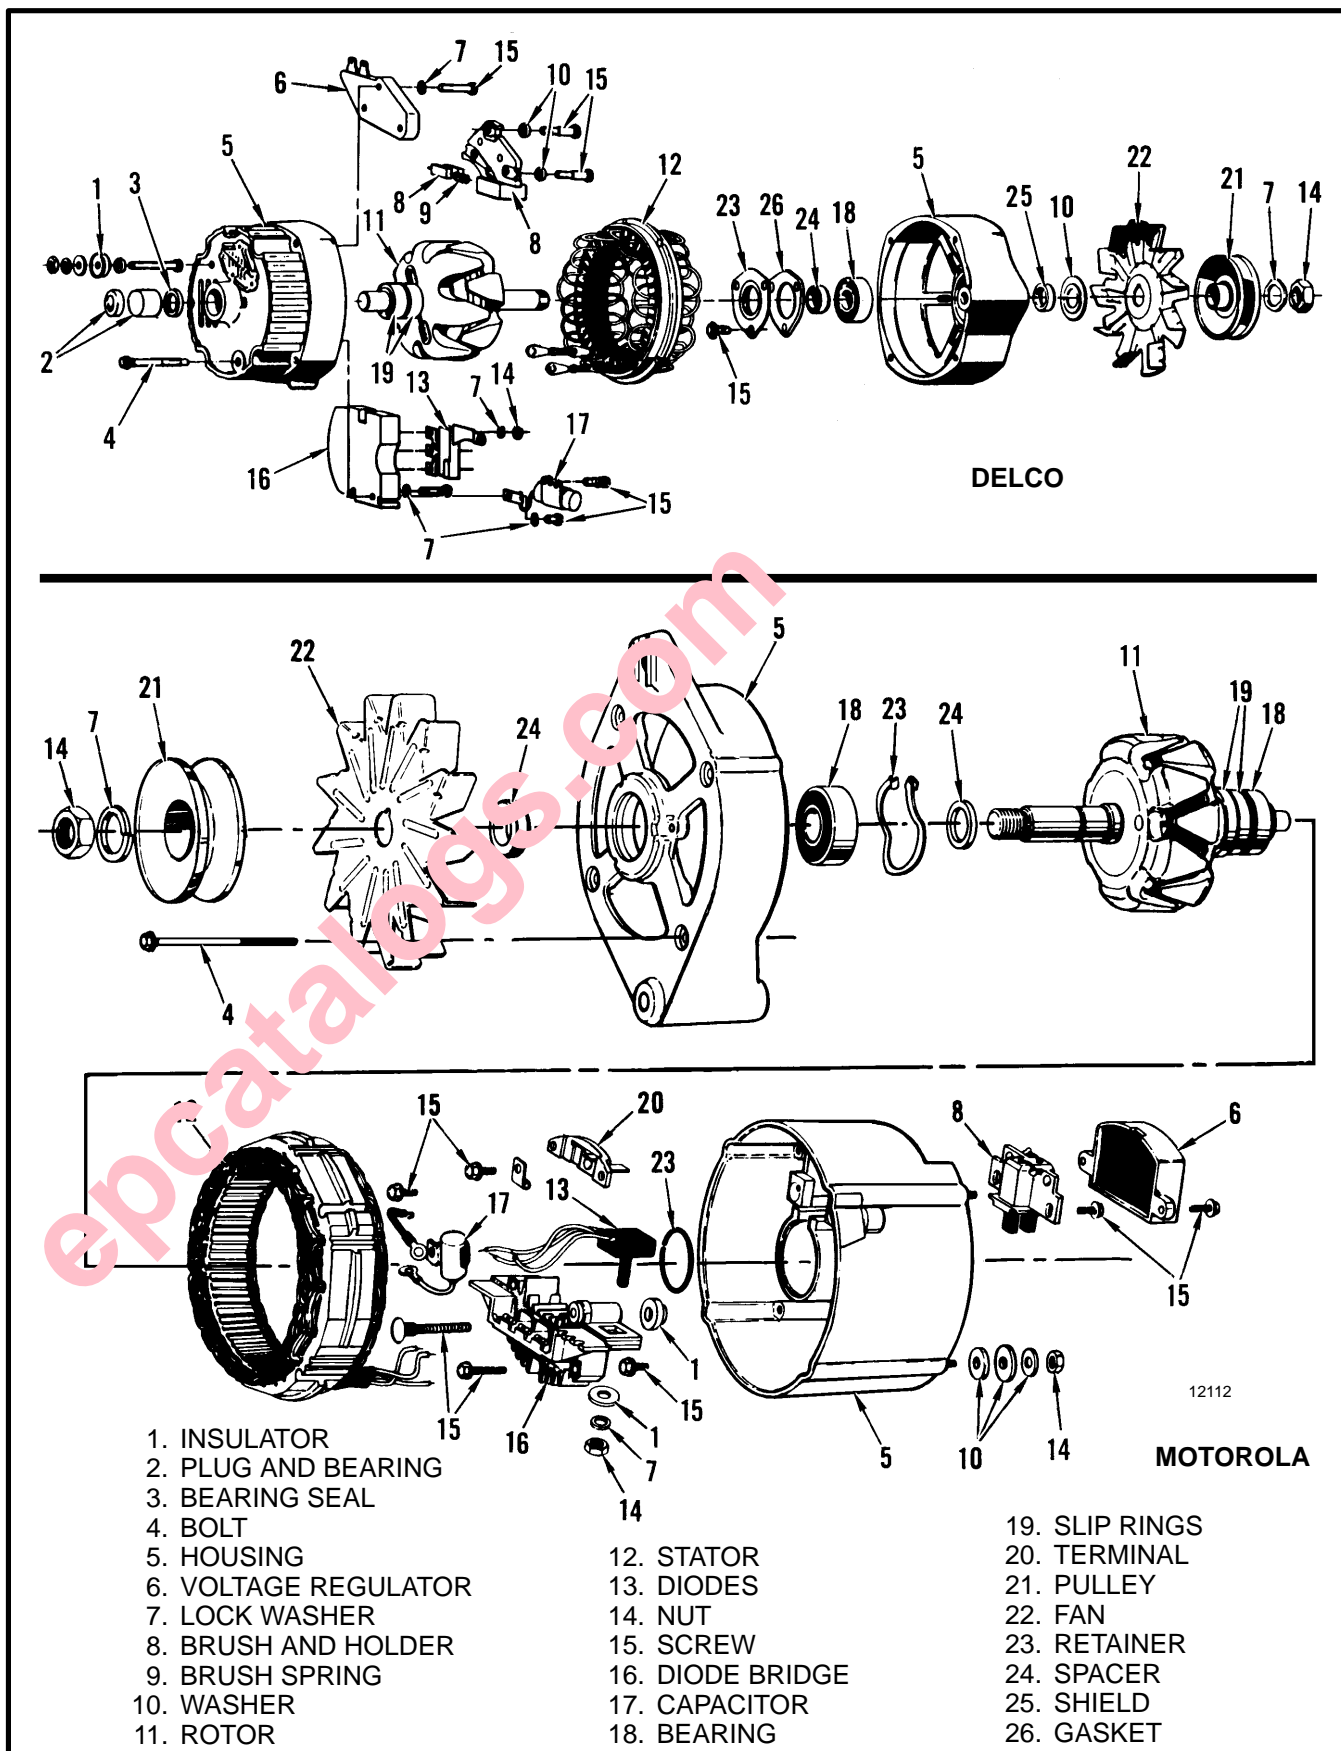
TYPE A ALTERNATORS, EXPLODED VIEWS
